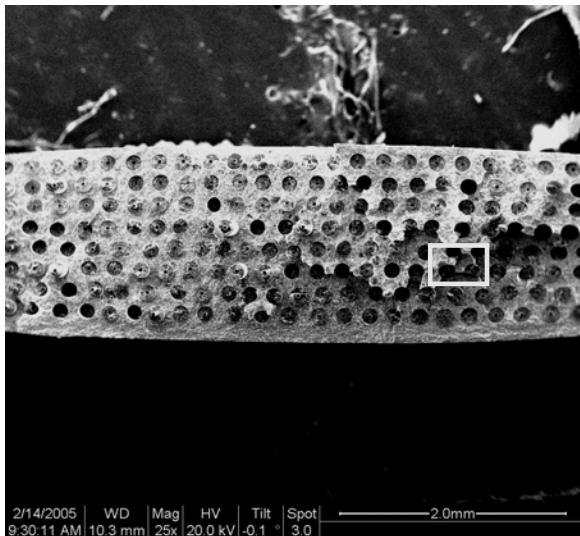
Specimen TMC-11, overall view of fracture surface
